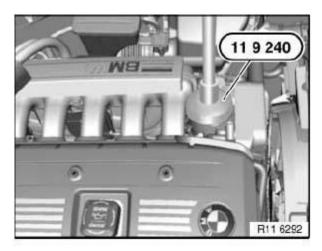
Removing Oil Filter Cap Using Special Tool (11 9 240) Courtesy of BMW OF NORTH AMERICA, INC.
